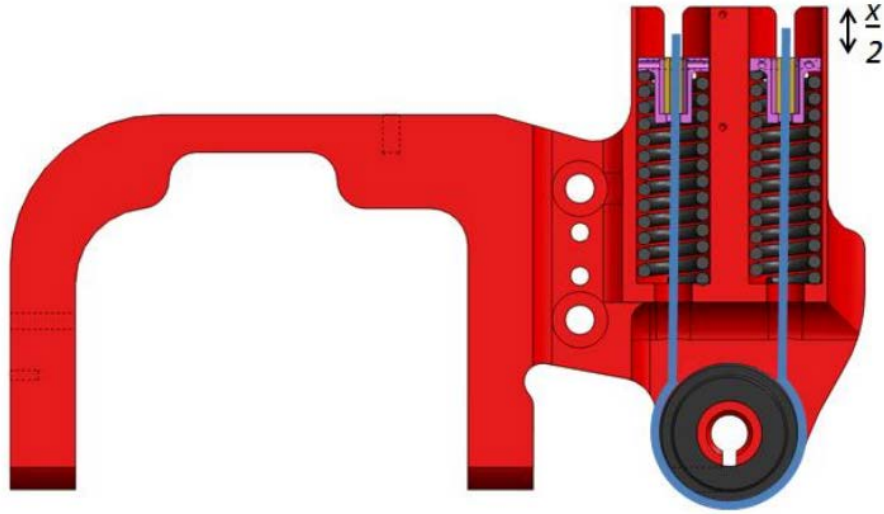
Cutaway section view of the Series elastic module integrated into the joint (10)
